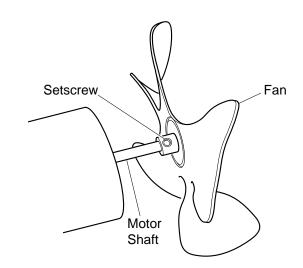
Fan, Motor Shaft, and Setscrew Location
